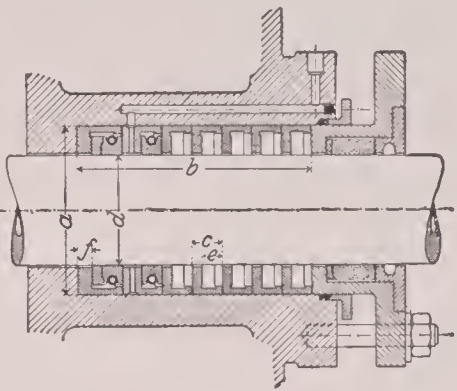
Schwabe Stuffing Box for Horizontal Engine.
